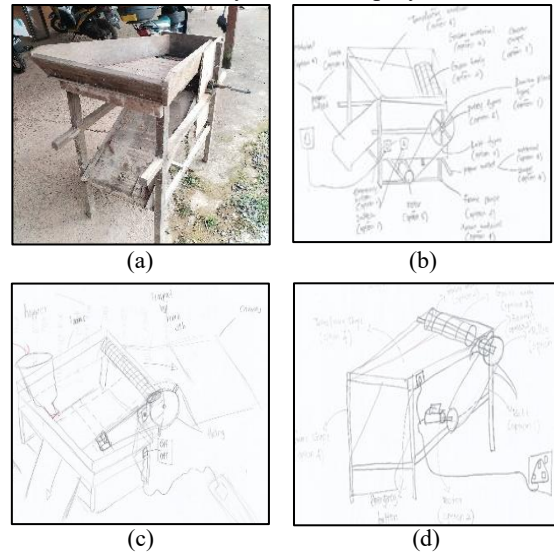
(a) Traditional design, used as a datum, (b) concept A (Motorized, Belt Drive), (c) concept B (Motorized, Chain Drive), (d) concept C (Motorized, Gear Drive)
